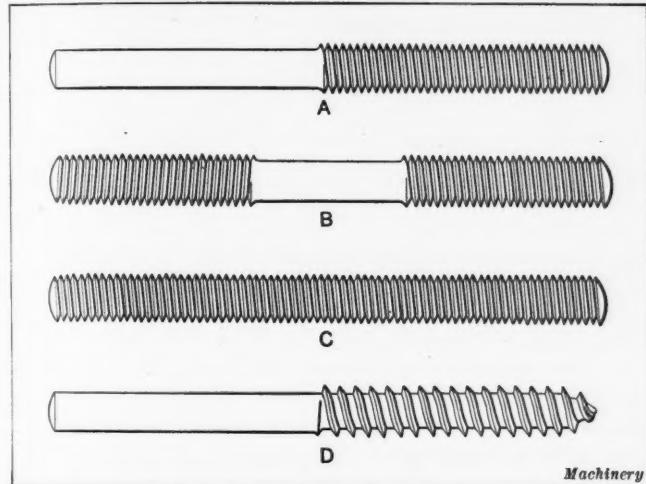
Examples of Work threaded by Machine shown in Fig. 12
